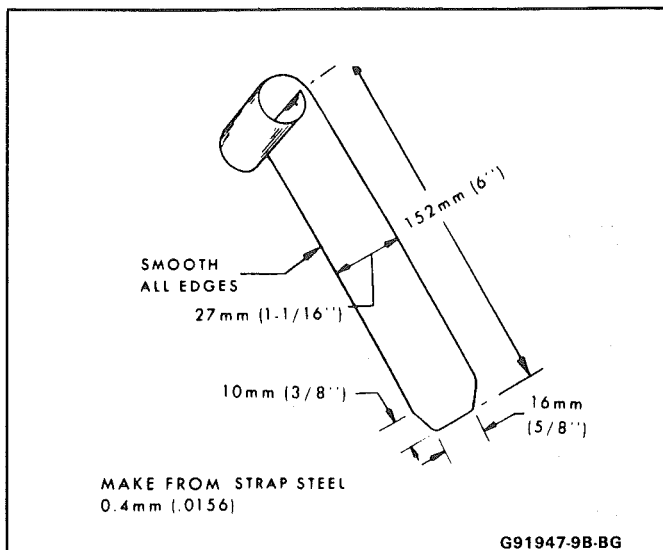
Head Restraint Antiremoval Lock Releasing Tool
